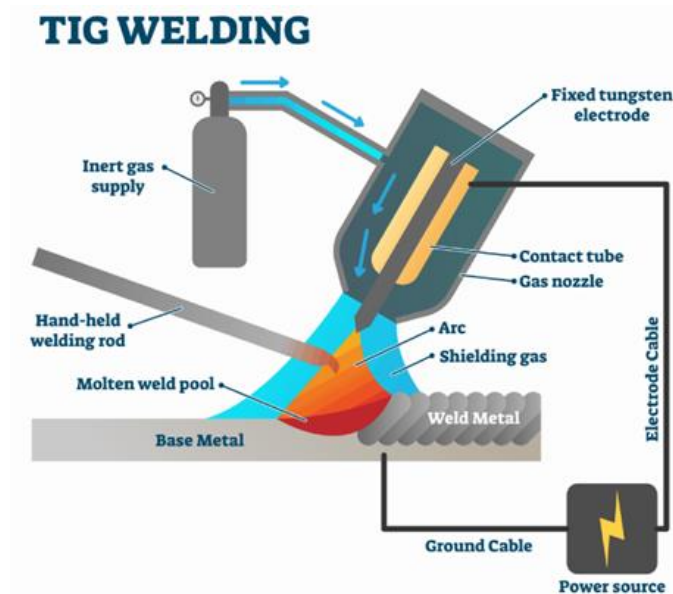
Scheme of TIG welding (Shirsat, 2020)
